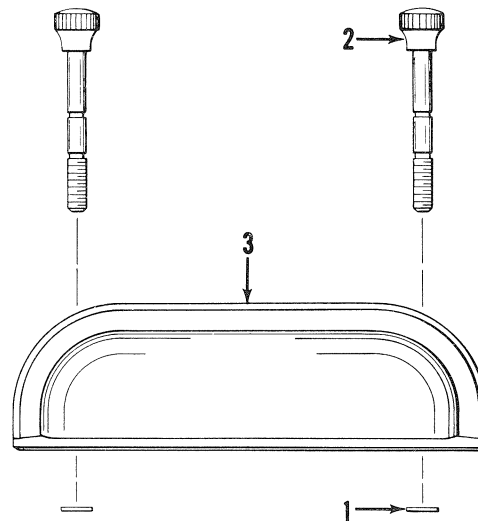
COVER ASSEMBLY - LAMPHOUSE
